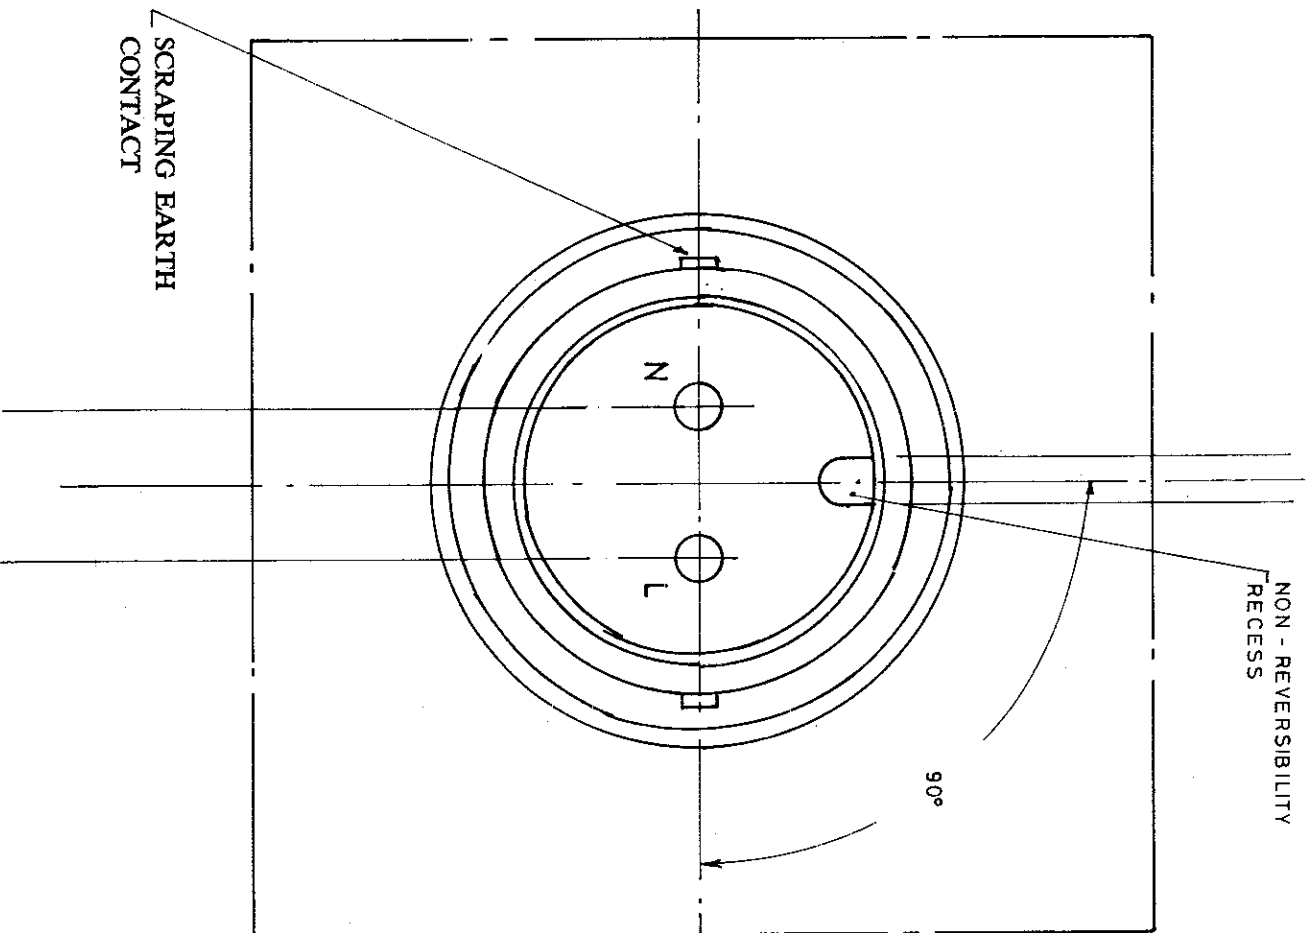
VIEW LOOKING AT THE FRONT OF THE SOCKET-OUTLET
